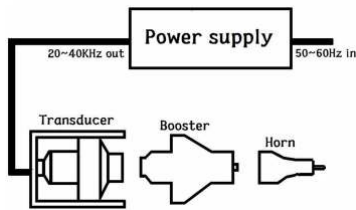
Basic Mechanism of Ultrasonic metal welding
